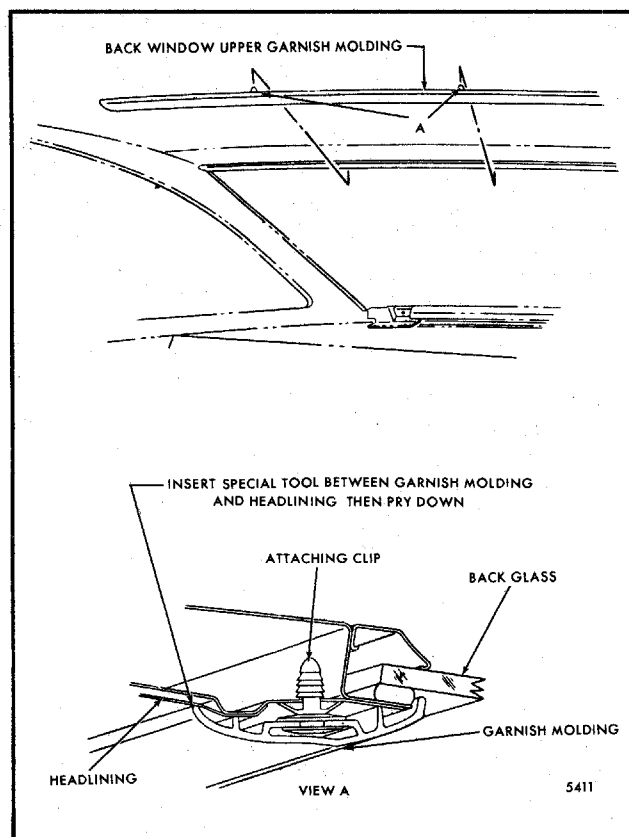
Back Window Upper Garnish Molding - "A" Styles
